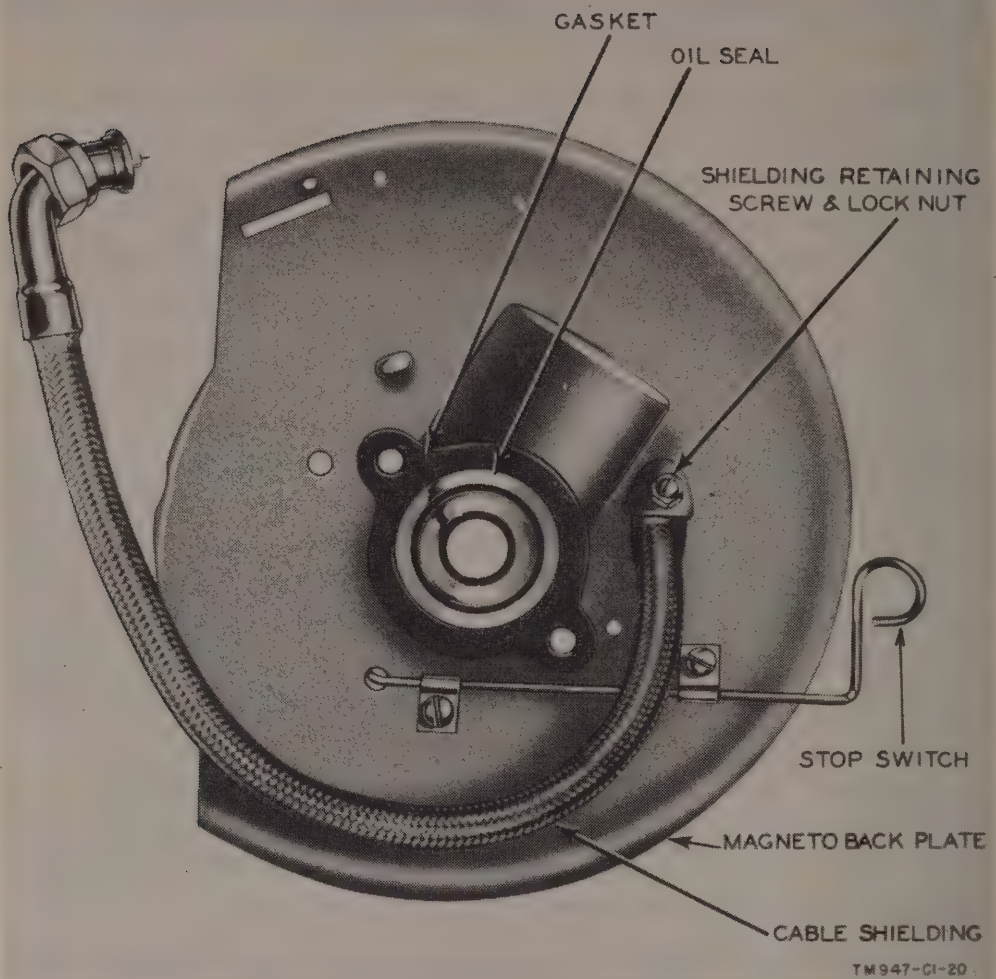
Power Unit PE-210-B, magneto backplate and cable.
